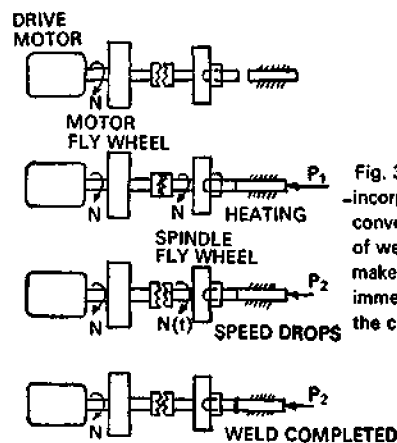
Flywheel Friction welding incorporating features of the conventional and inertia methods of welding. The motor flywheel makes the weld energy almost immediately available. Once the clutch is engaged.
